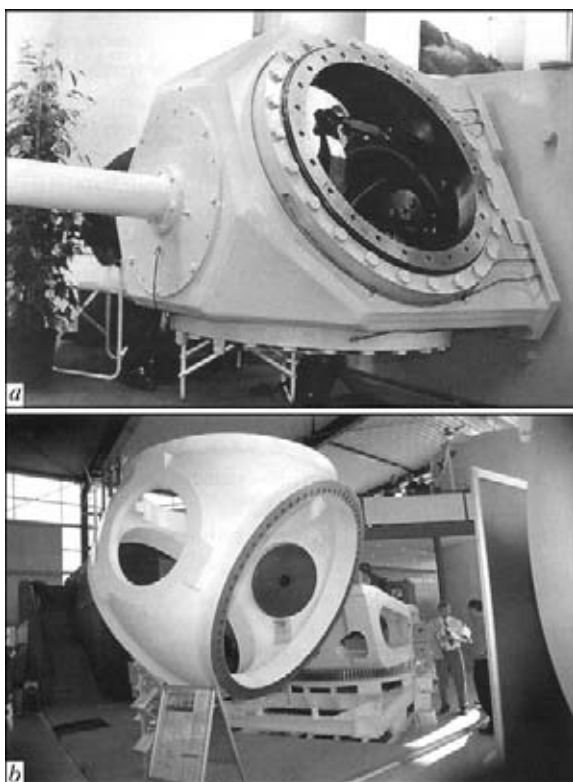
Appearance of a bushing of wind generator rotor: *a* – welded structure from sheet steel; *b* – casting from spheroidized cast iron of 15 t mass
